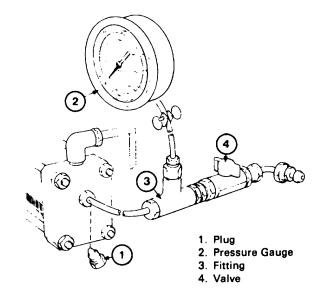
H-110. The Pressure Gauge and Control Valve Connected to the Clamp Cylinder
